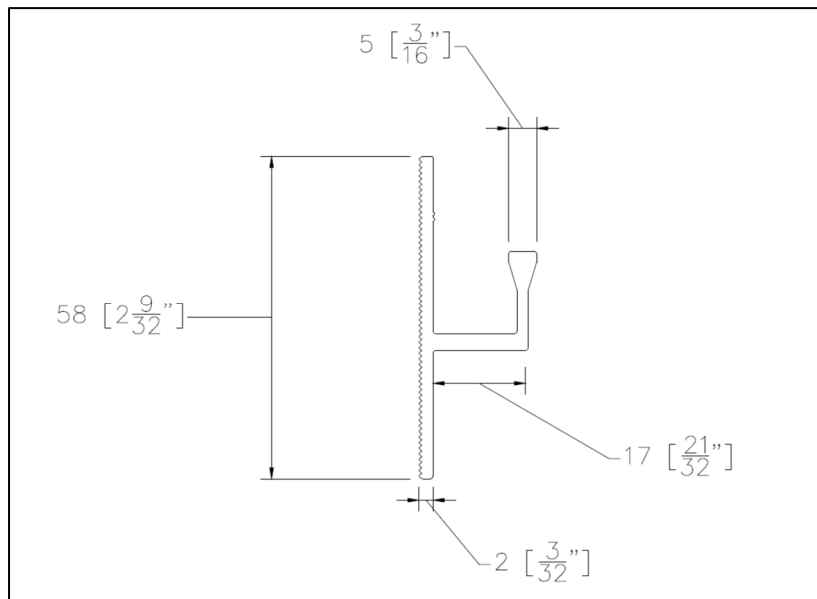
HORIZONTAL ALUMINUM PROFILE mm [inches]
